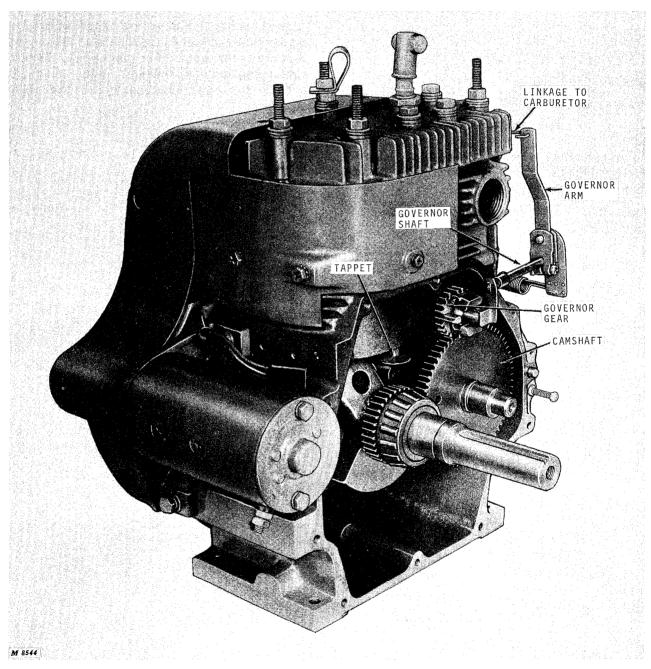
Assembled View of Camshaft, Tappets and Governor
